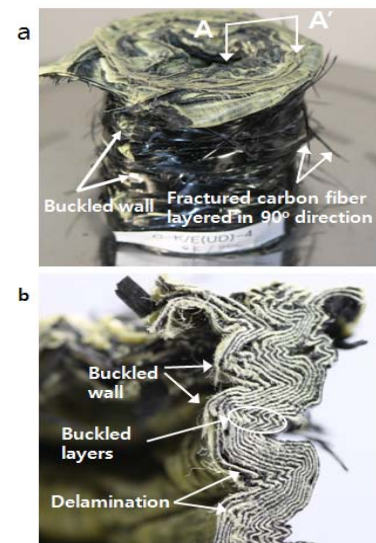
(a) Crushed [90c/0k] hybrid as lamina bending mode and (b) Sectional view of A-A'.
